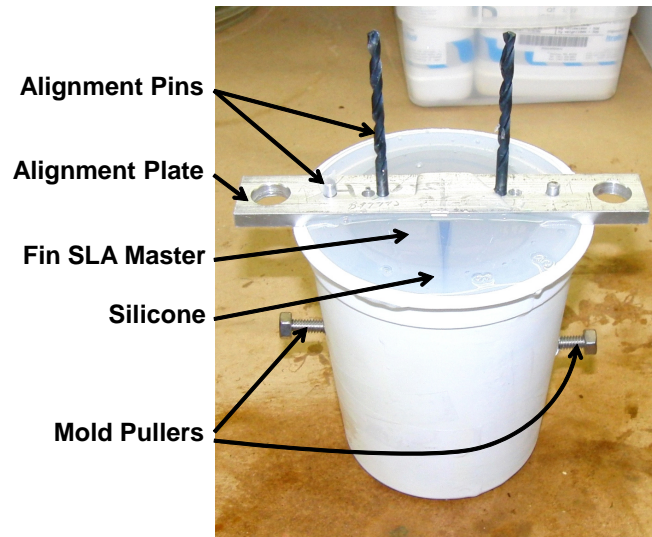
Fin mold fabrication with alignment fixtures in place; the mold silicone is visible in this photograph
